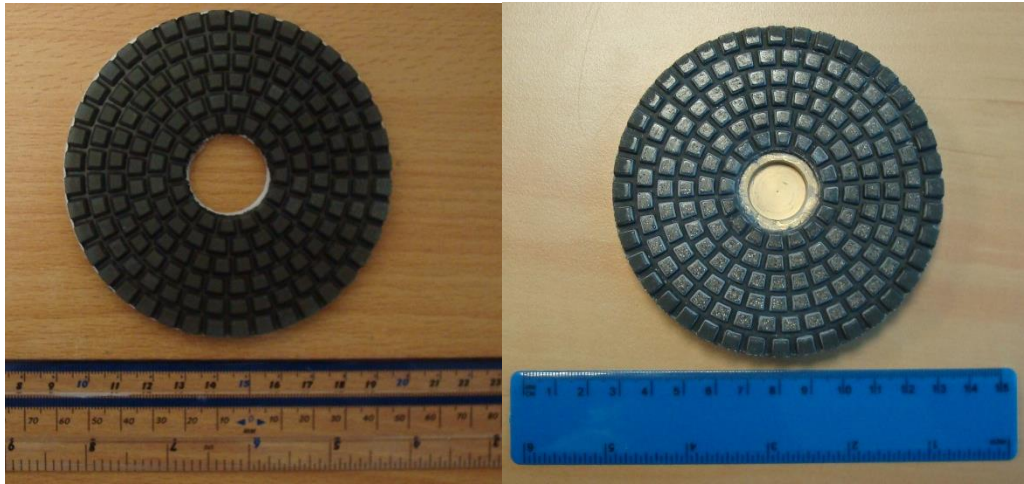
The surface of the KGS pad after conditioning by hand (left) and a grinding wheel (right).
